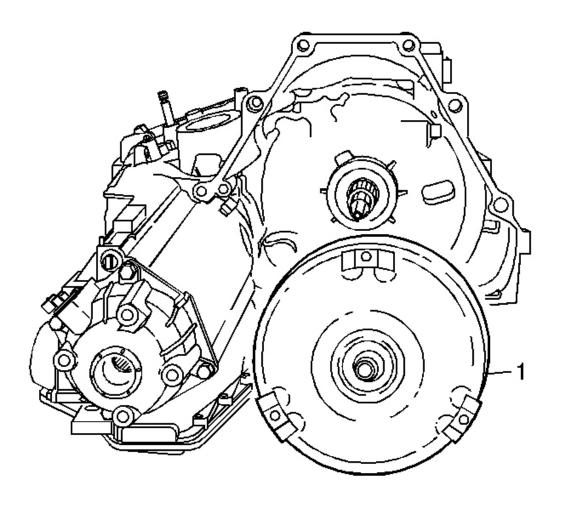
View Of Torque Converter Assembly Courtesy of GENERAL MOTORS CORP.
